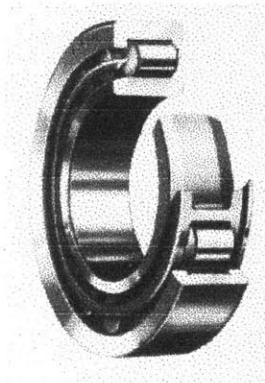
Cylindrical Roller Bearing. Source: NSK-RHP
